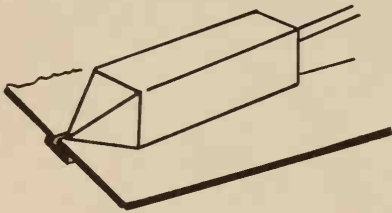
Hold one face of the soldering copper flat against the surface of the metal.
